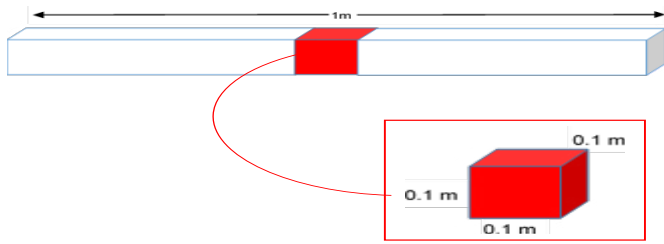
Magnified view of the cross-section of the designated weld (affected) zone
